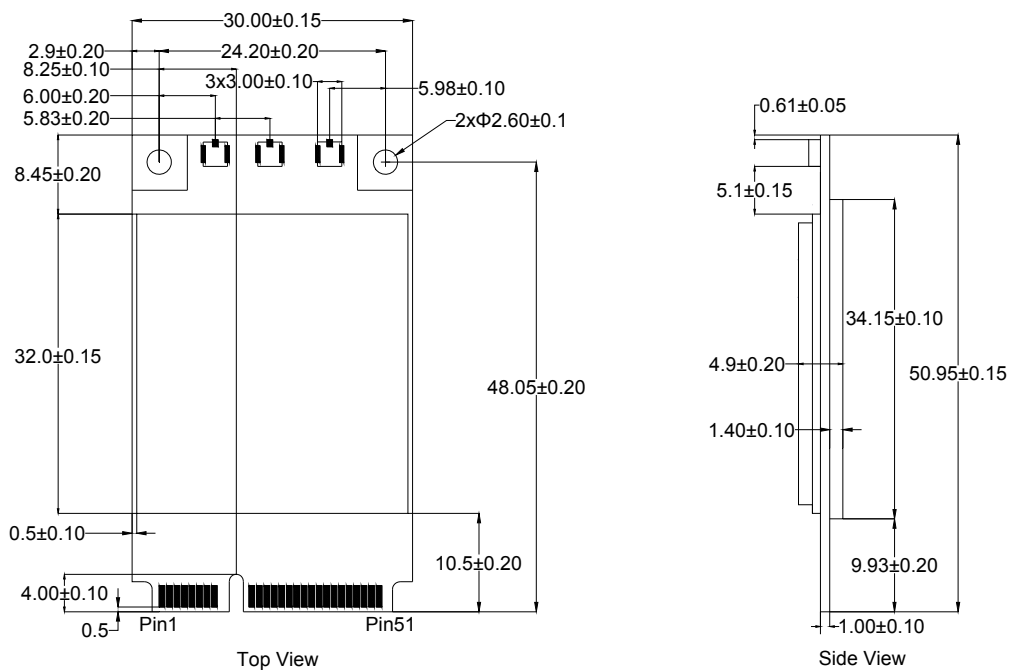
Mechanical Dimensions of UC200T-GL Mini PCIe
